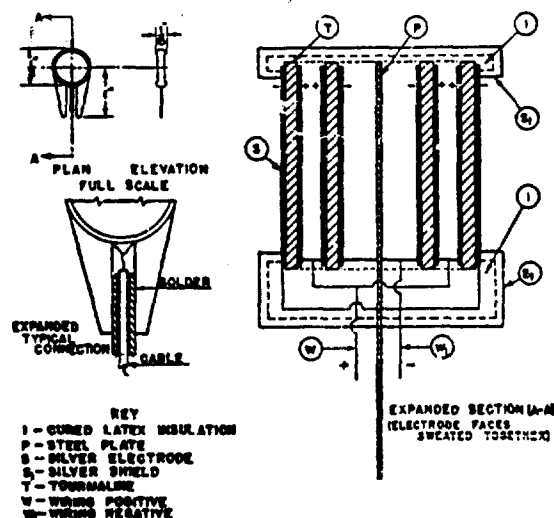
Assembly drawing of UERL-type tourmaline gauge.
